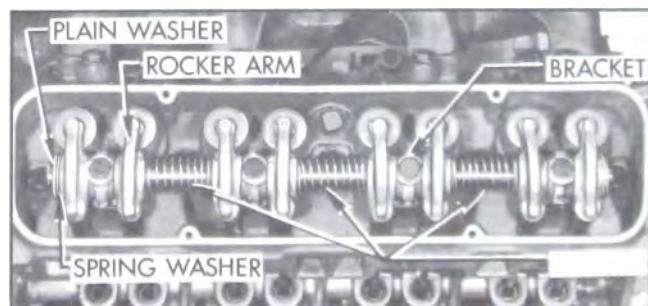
Rocker Arm Shaft Assembly (V-8 shown)
